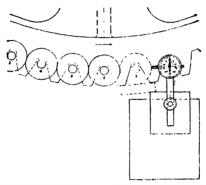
Actual indexing of gear was done with the aid of a dial indicator by bearing it against one of the special disks.
